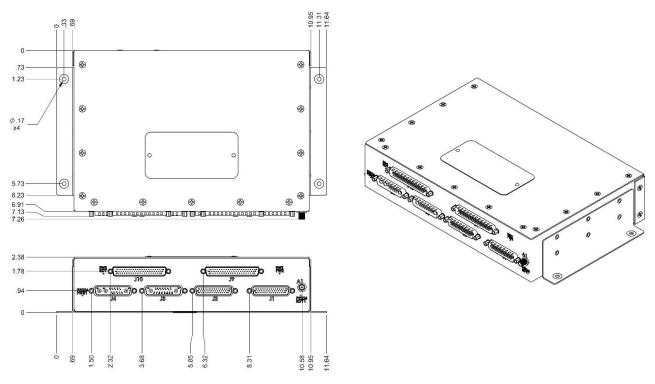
PRIZM -53 Dimensions and Mounting Dimensions
